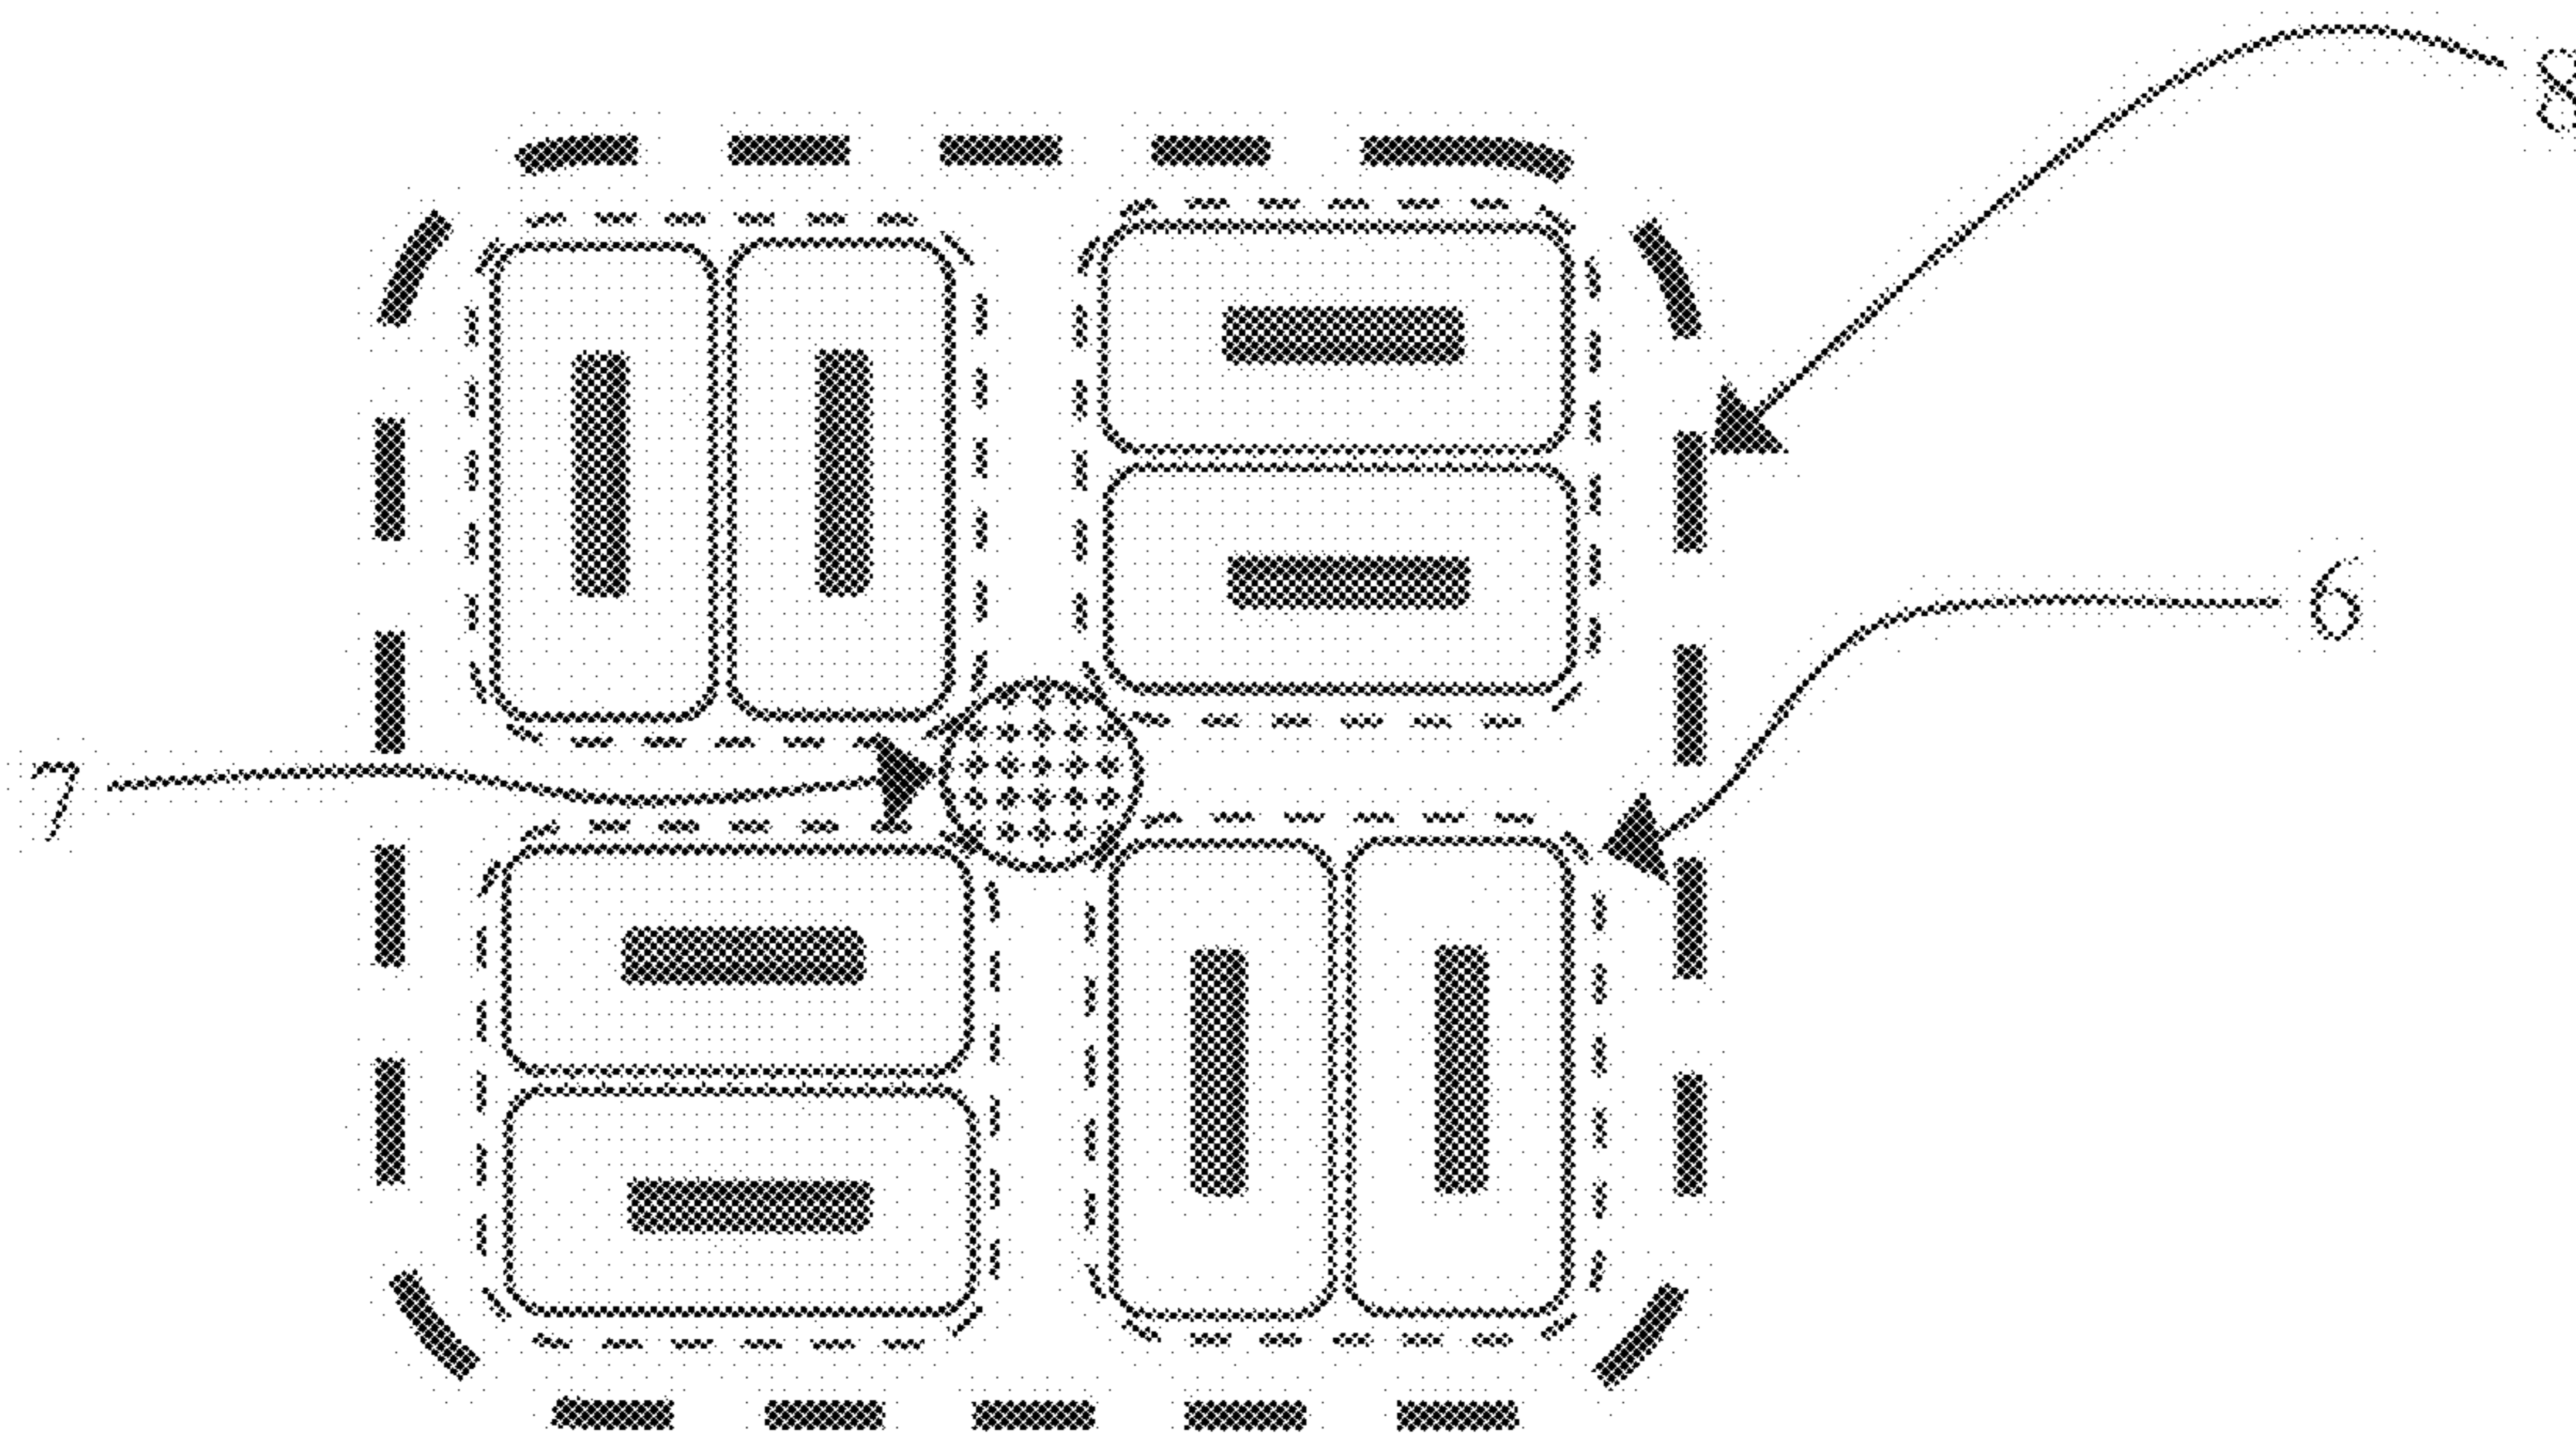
Cross-section of a Shielded Flat Pair Cable (Preferred embodiment)
